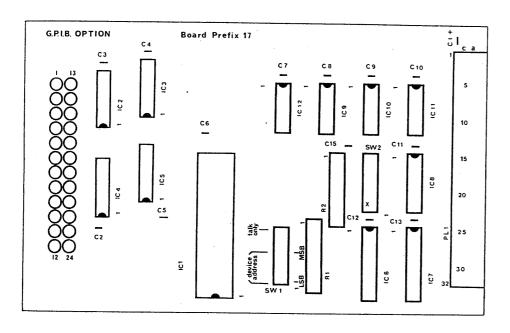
GPIB/Handler Interface Option - PCB Layout
